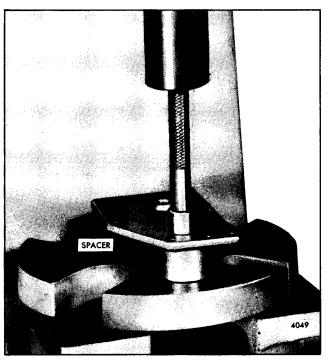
Removing Governor Cover Bearings using Tool J 21967-01
